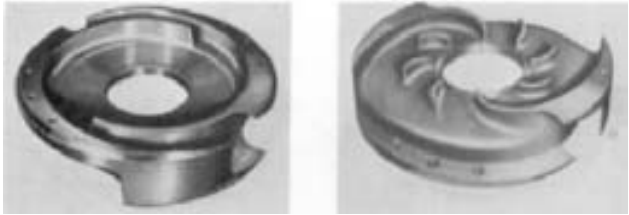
The double volute of a multistage pump, front view (left) and back view (right) (Flowserve Corporation)
